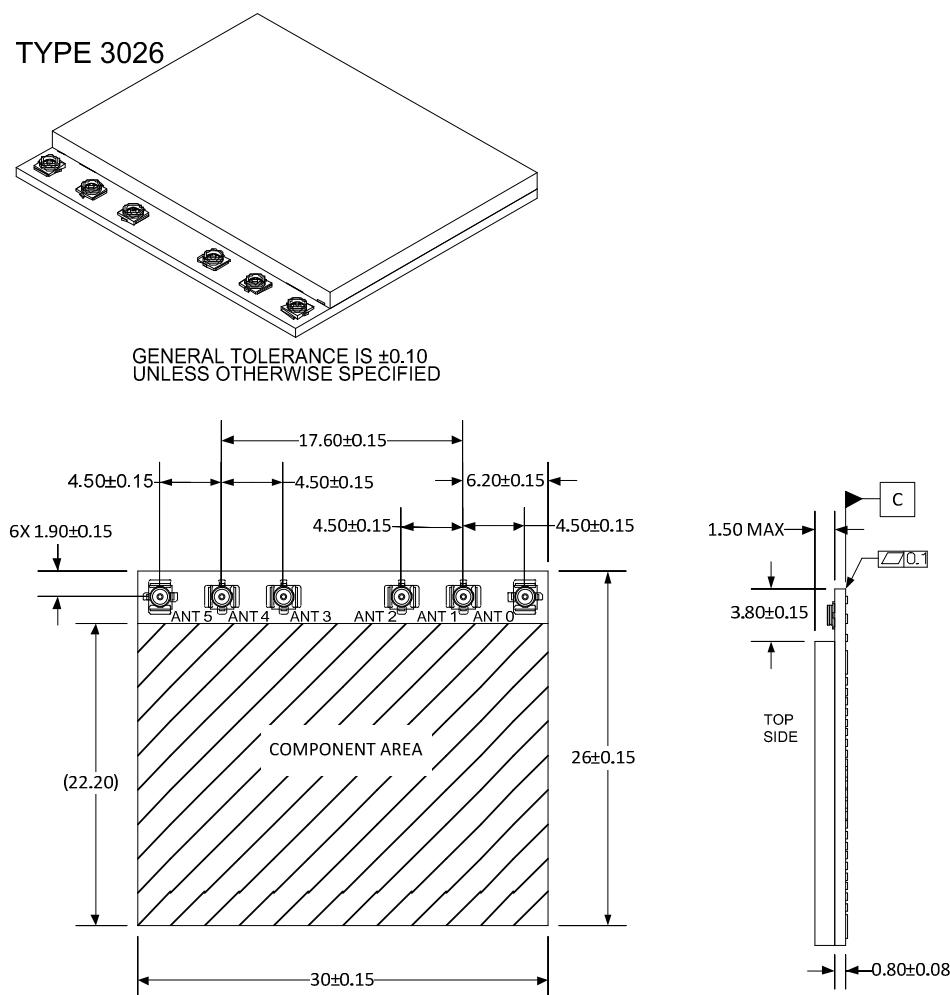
M.2 Type 3026-S3 Mechanical Outline Drawing
